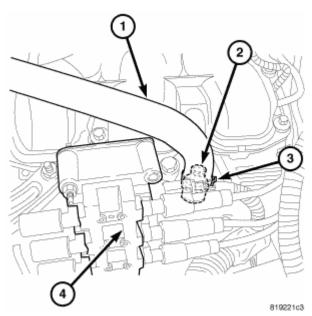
PCV Valve Location 3.8L Courtesy of CHRYSLER LLC
